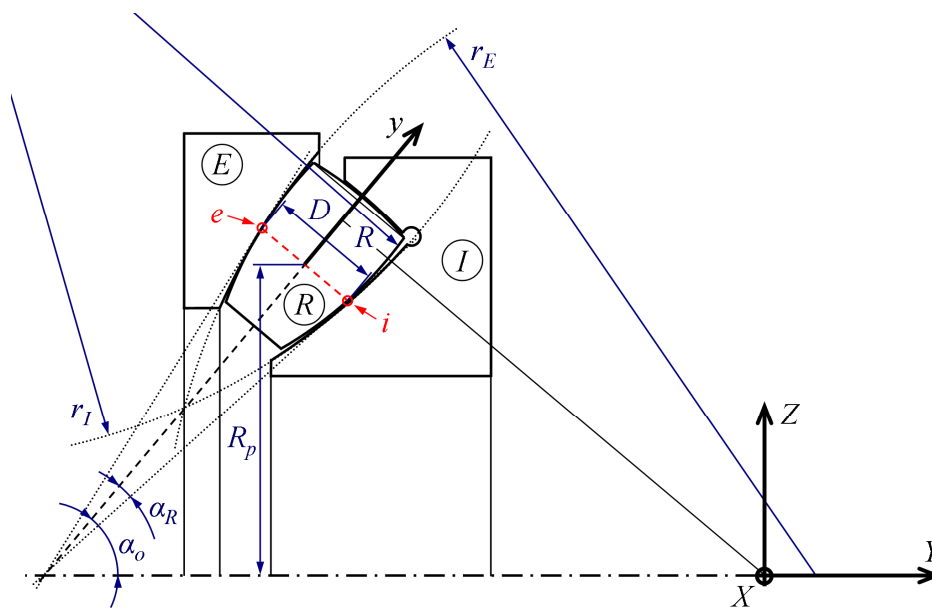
Sectional view of a rolling bearing, with some relevant dimensions.
